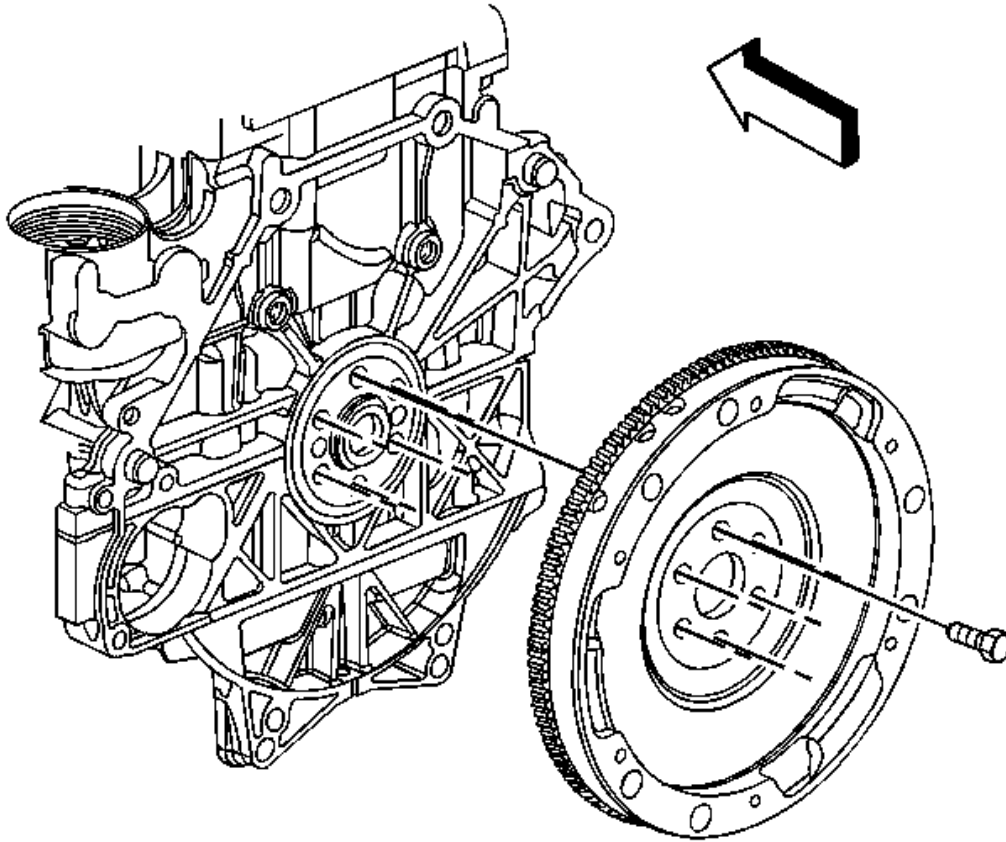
View Of Flywheel & Bolt (Manual Transmission)
